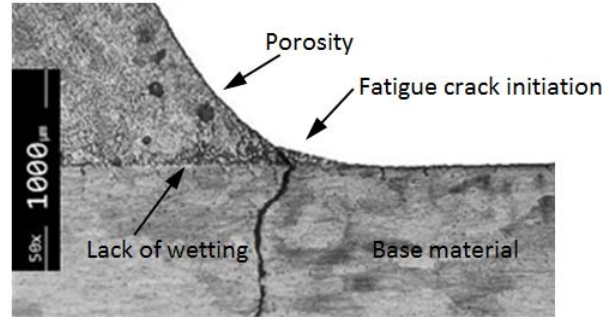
Fatigue crack initiation site on a MIG weld (AA 6082-T651).
